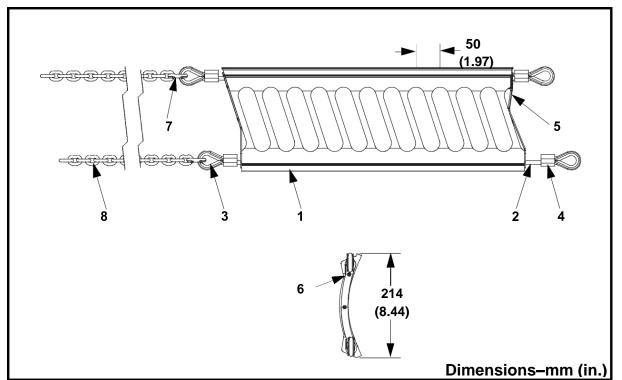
CleanScrape® Medium Cleaner, P/N C1CMXRXXXXXX
